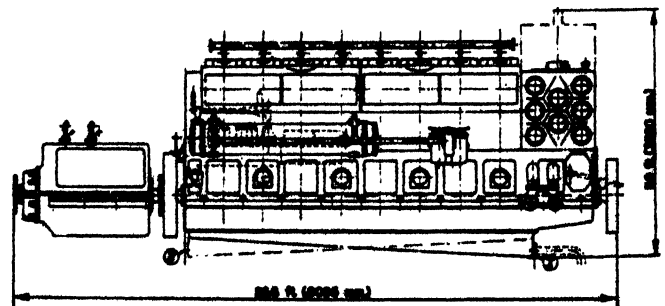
Alpha engine, with hydraulically-operated clutch and gear for controllable-pitch propeller
